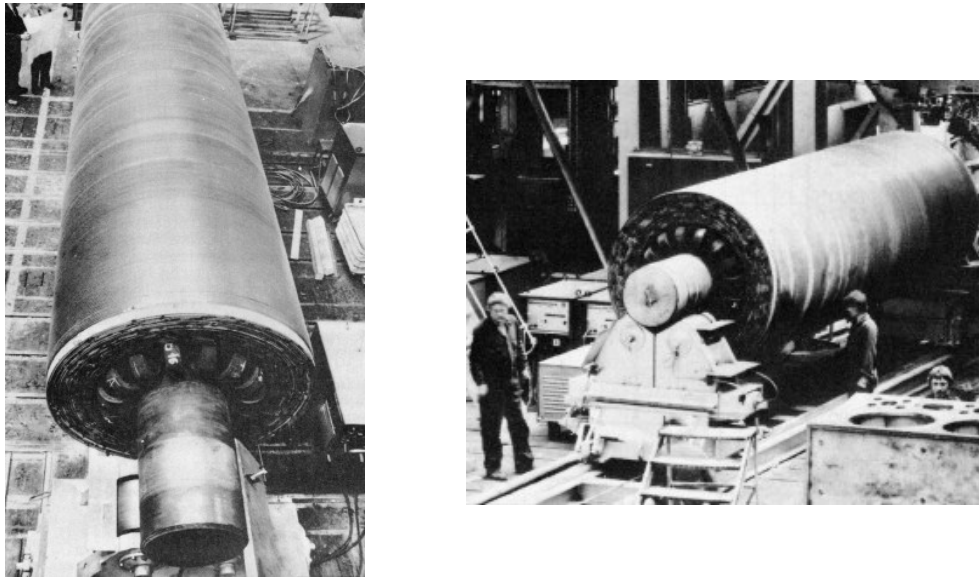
Shape welded 79 t cylindrical test shell and production machine (Kußmaul *et al.*, 1983).
